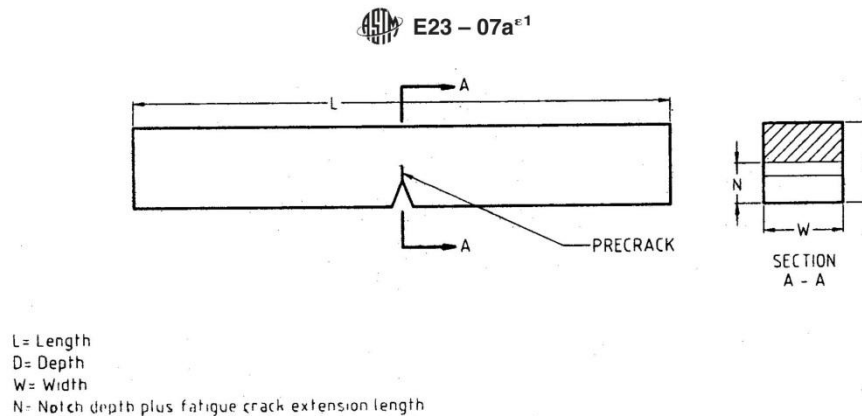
Charpy (Simple-Beam, type A) Impact Test Specimen
